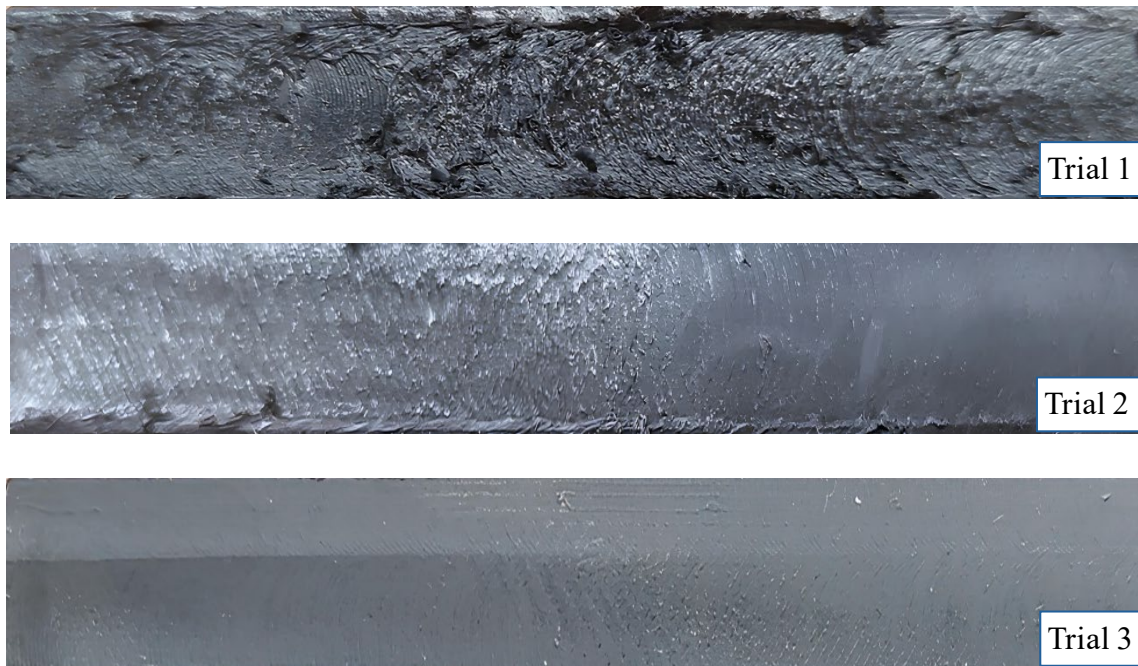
Comparison of milled surfaces from trials 1-3 (4 mm tool radius)
